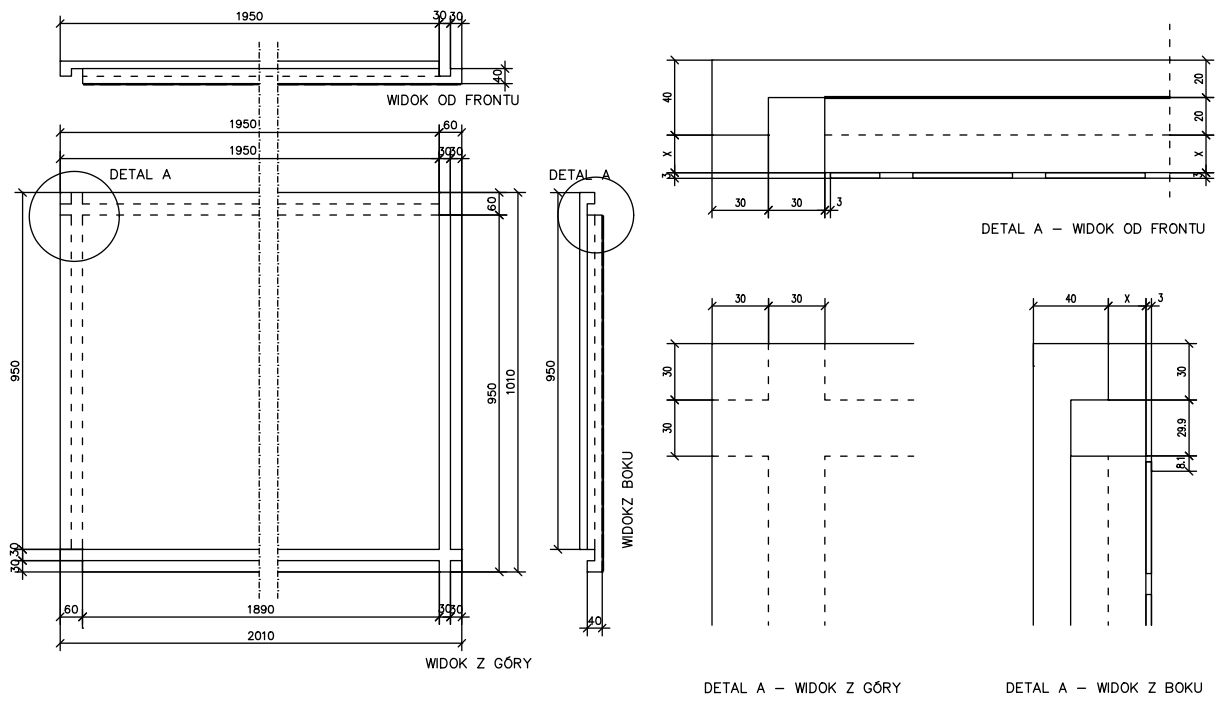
Additional board panels; $x = 20, 40, 60,$ and 80 mm (front and side view)
